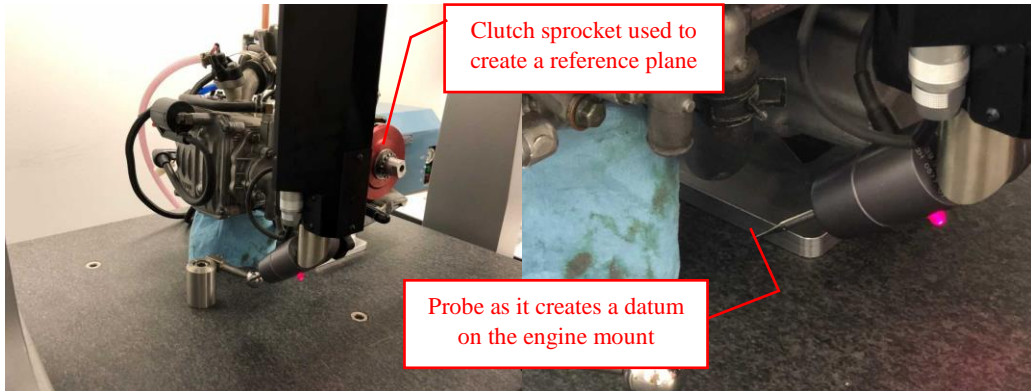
Full picture of engine and CMM (left) and the datum created (right).
